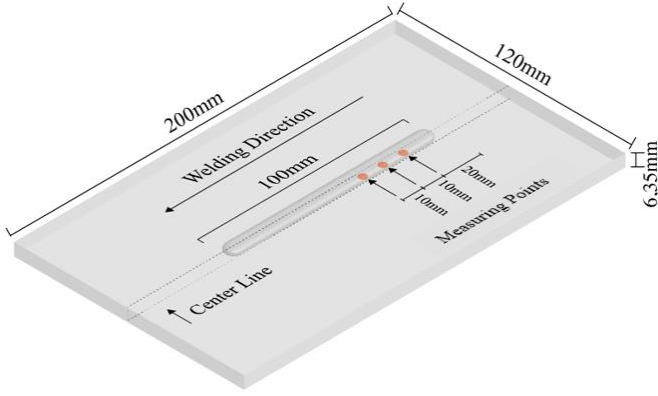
Schematic representation of system considered in this research with the welding bead, welding plate, and three points where measurements are taken.
